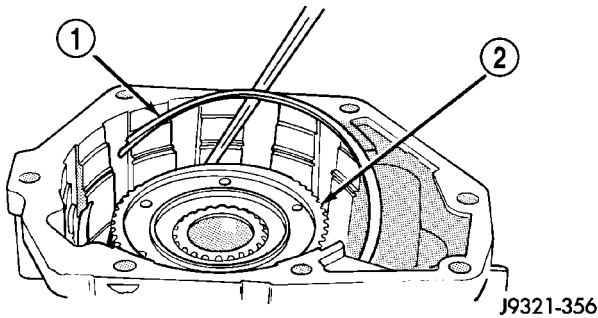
Overdrive Clutch Wave Spring Removal - 5 Disc Clutch Only
